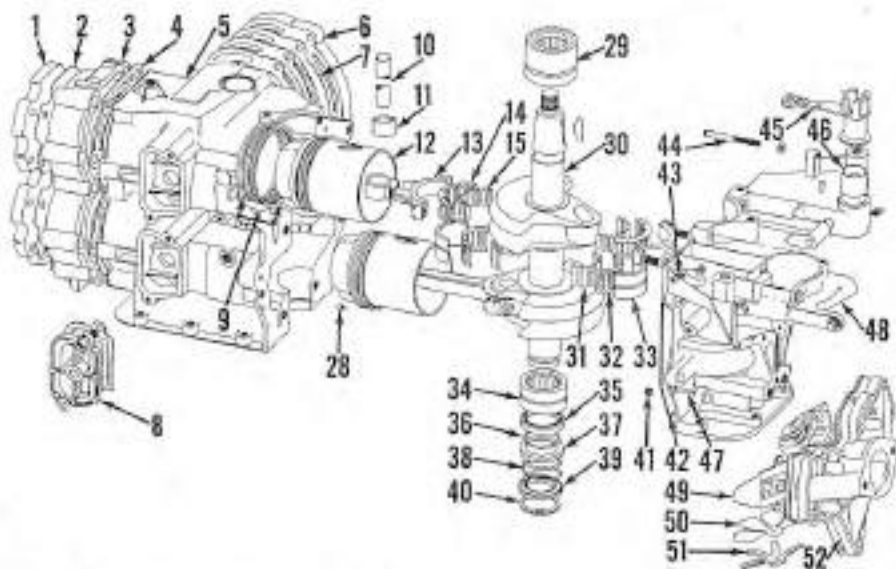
Exploded view of power head used on late models. Early models are similar.
